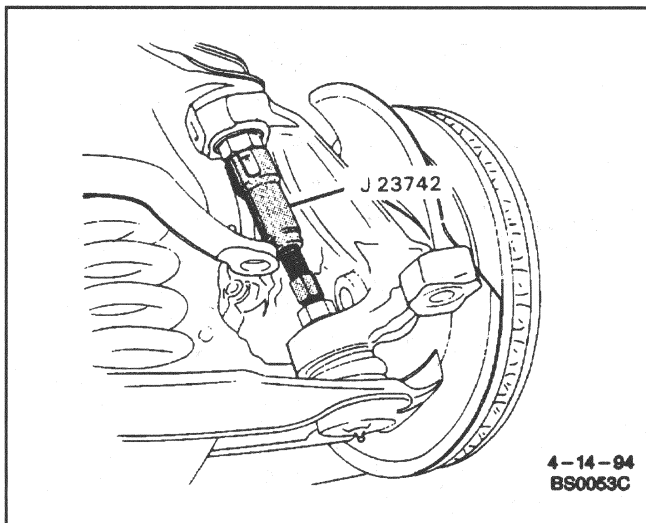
Disconnecting Front Lower Control Arm Ball Stud
